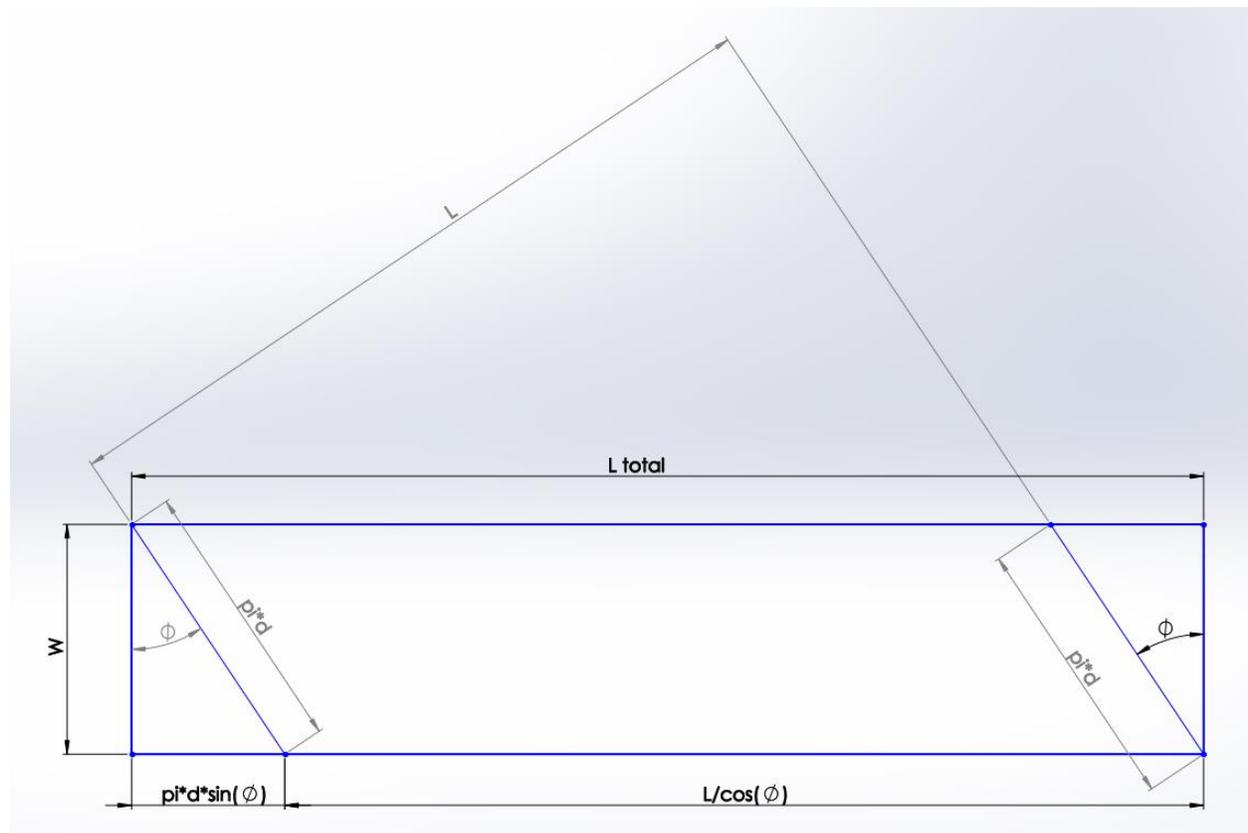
Sheet and cut geometry for various tube lengths, diameters, and wrap angles.
